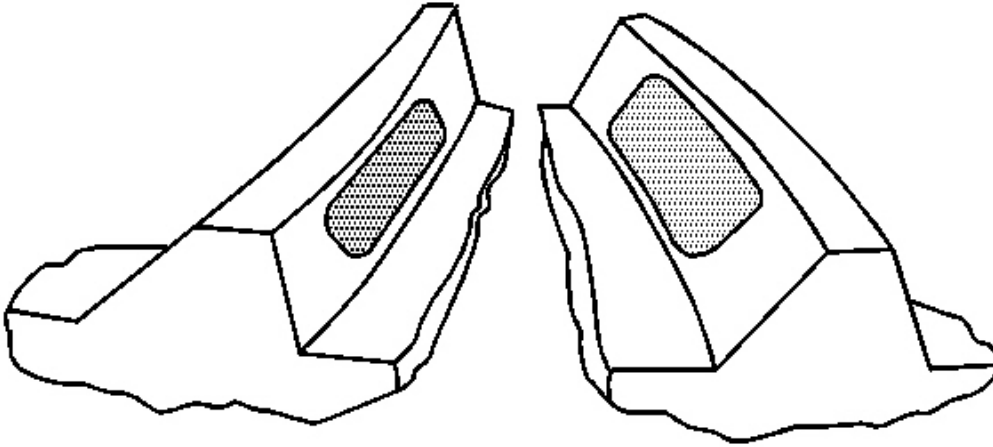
Identifying Correct Gear Tooth Contact Pattern
